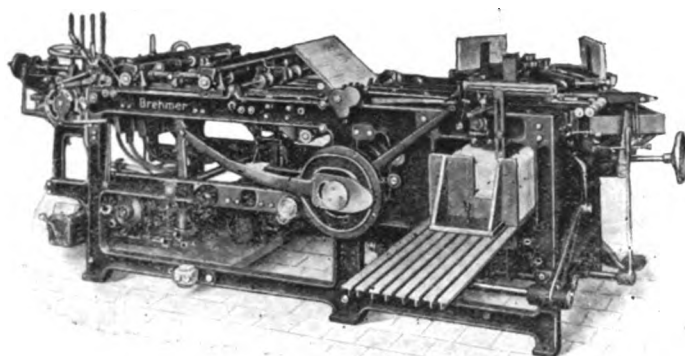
PAPER COVERING MACHINE (AUG. BREHMER)
